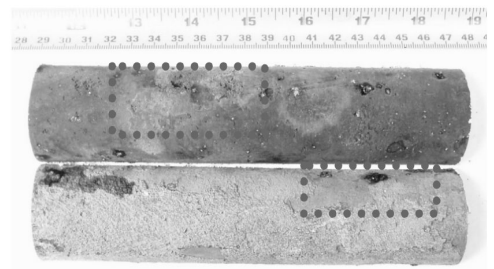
Photographs of the corroded aluminum heat exchange tubes in a NH_3 condenser: (a) the front view and (b) the back view.
